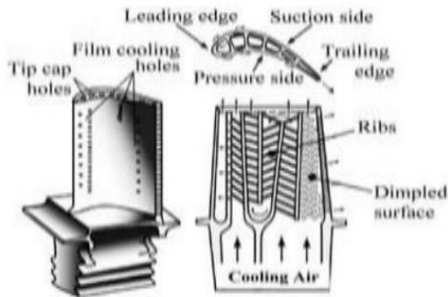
Turbine Blades Cooling Due to corrosion and corrosion deposits turbine blades fail
